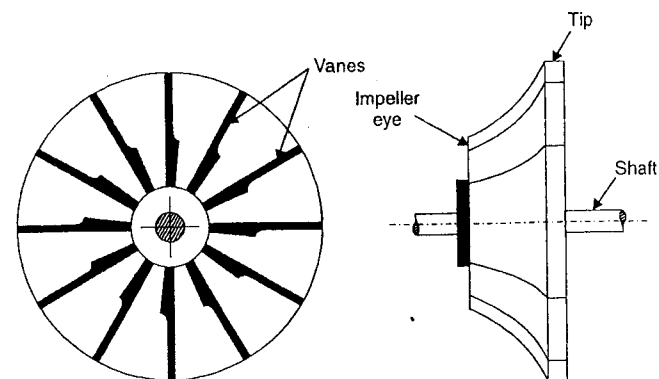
Impeller (single-eyed) and radial vanes of centrifugal compressor.
